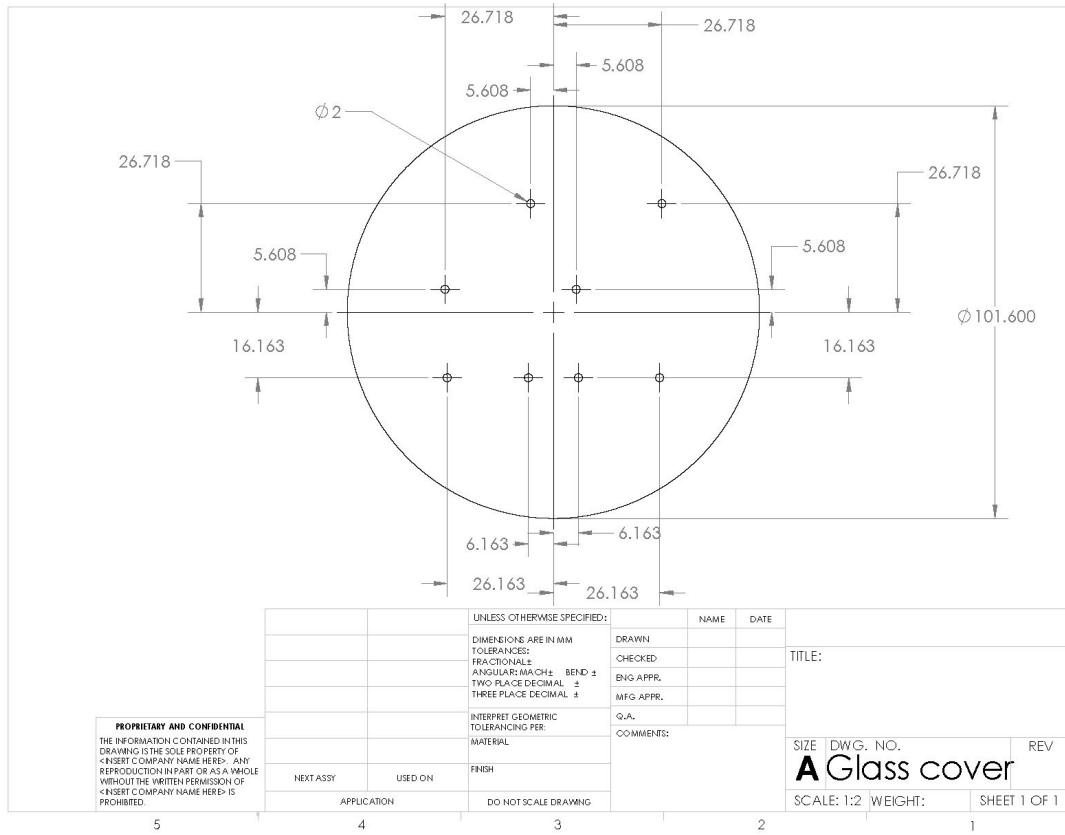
Drawing for borofloat glass cover with inlet and outlet holes
